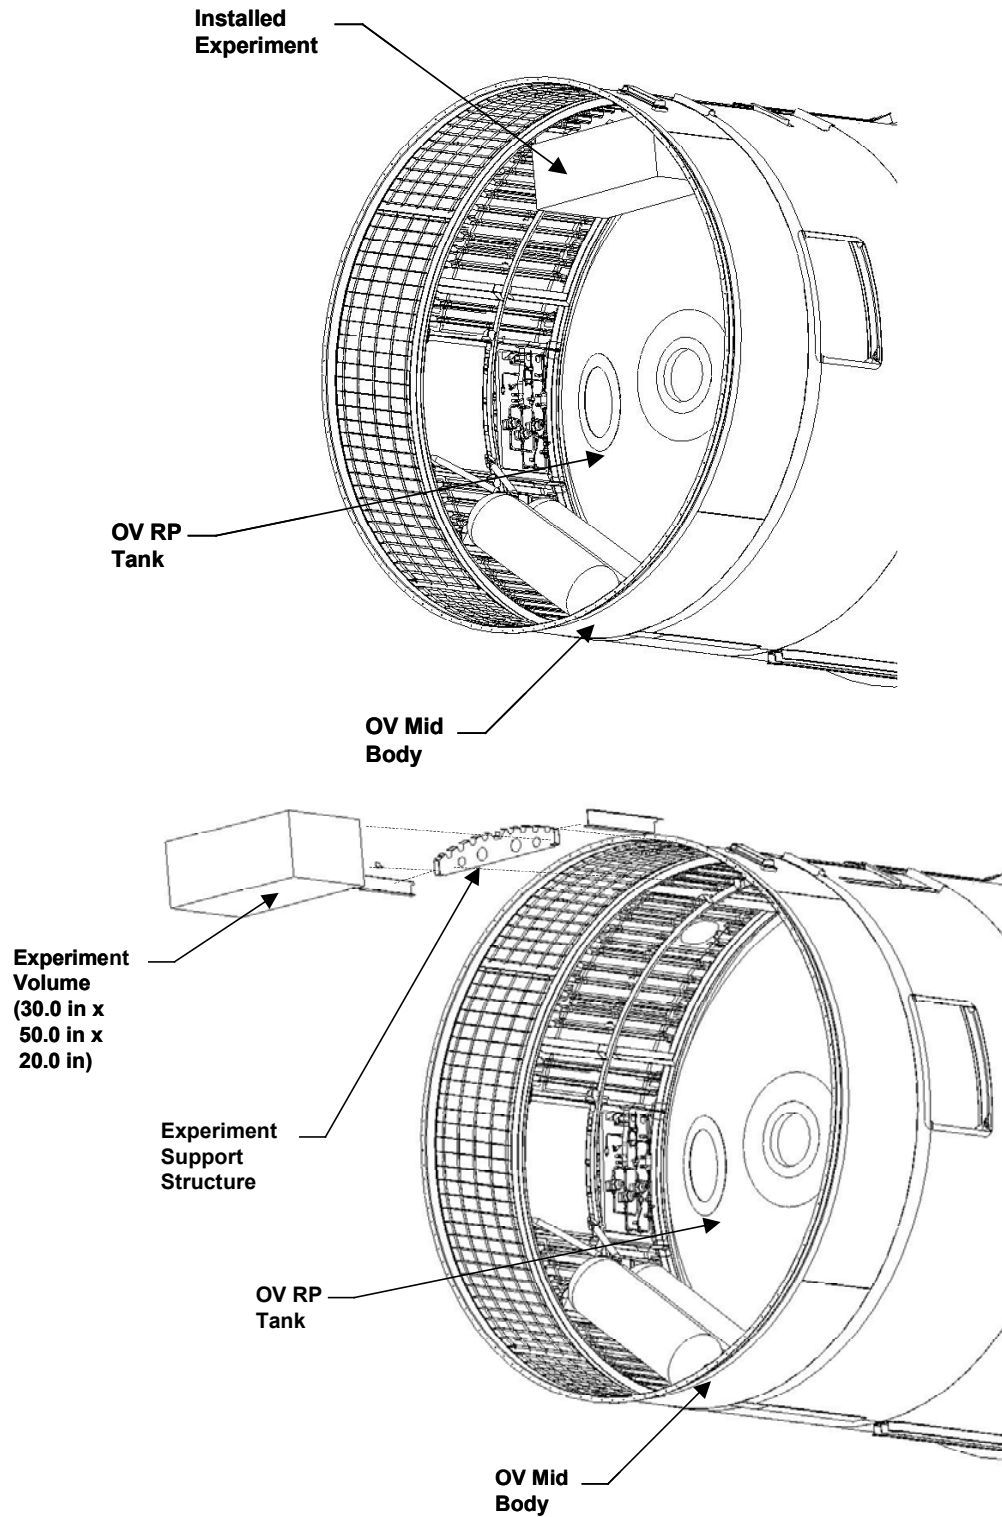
Mounting Structure for Internal Mounting Location in OV Mid Body
